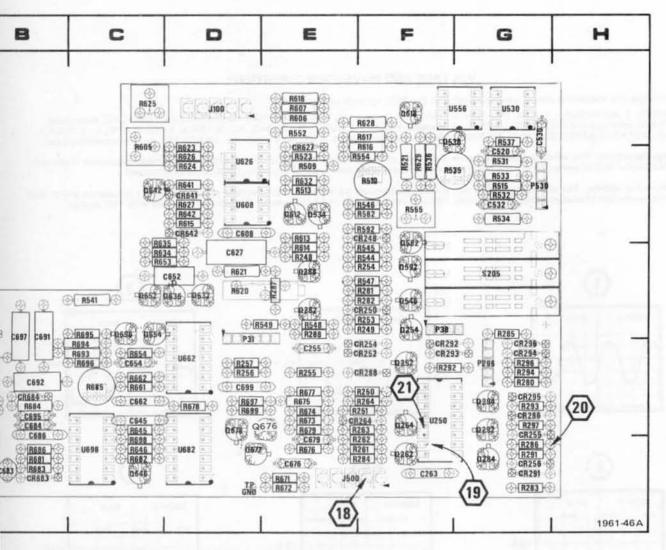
B. A4-(SN B088749 & Below) Digital Voltmeter circuit board assembly.
